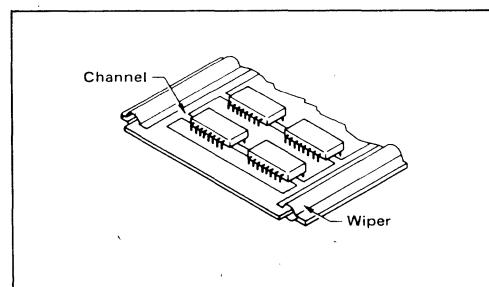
CHANNEL/WIPER HEAT SINKING ON DOUBLE LAYER BOARD
